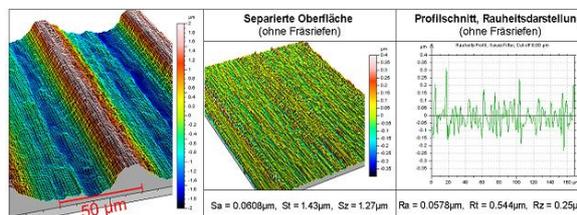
Metal surface with milling grooves (3D-Shape GmbH)
